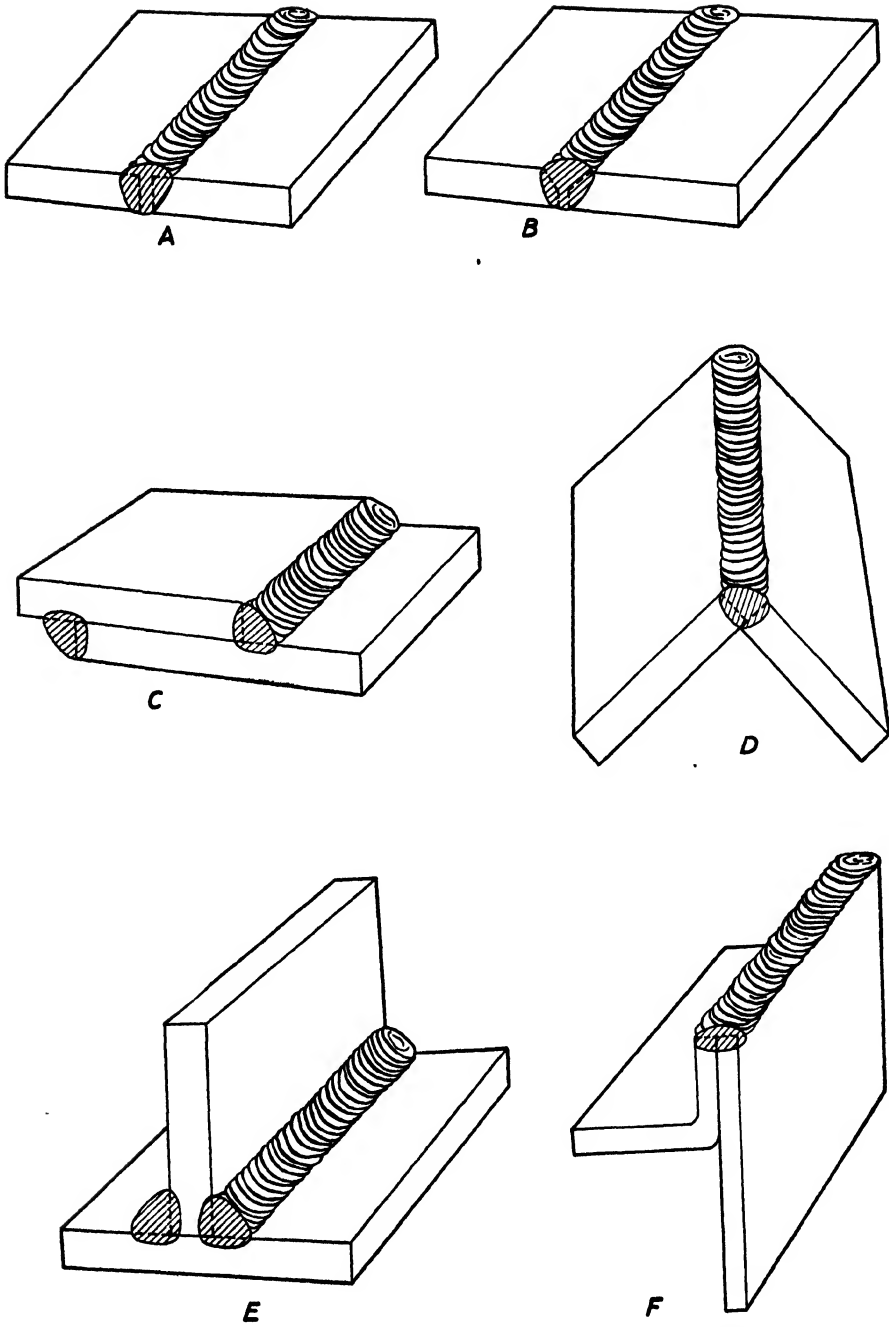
Common types of welded joints: A, plain butt joint; B, grooved butt joint; C, lap joint; D, tee joint; E, corner joint; F, edge joint. Welds on joints C, D, E are known as fillet welds.
